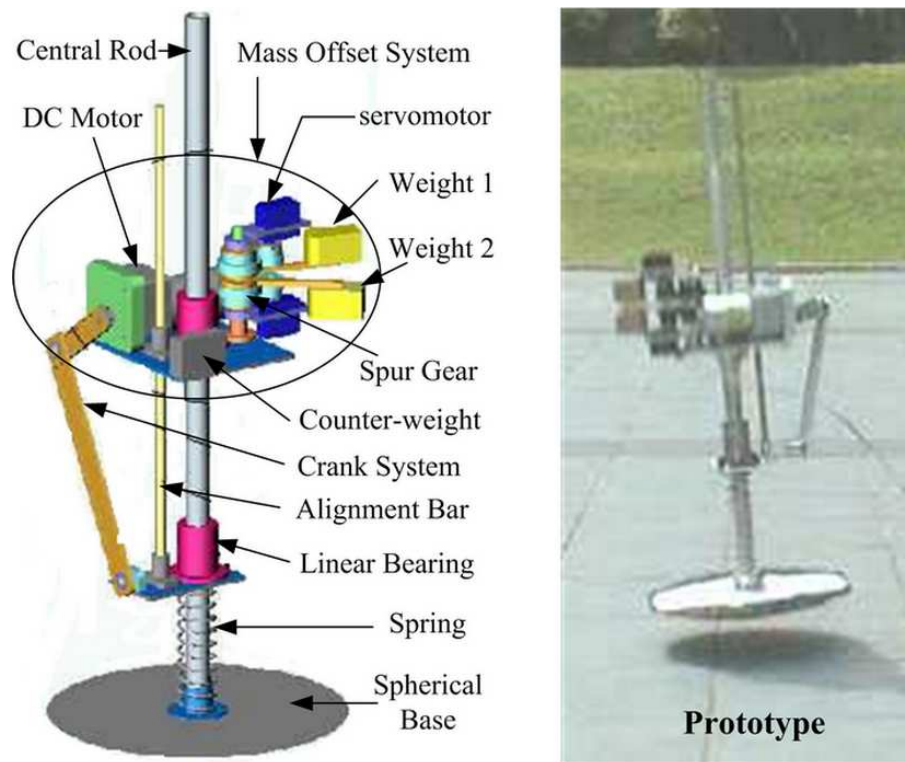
An overall design and prototype of hopping robot built by Chew *et al.* [13]
